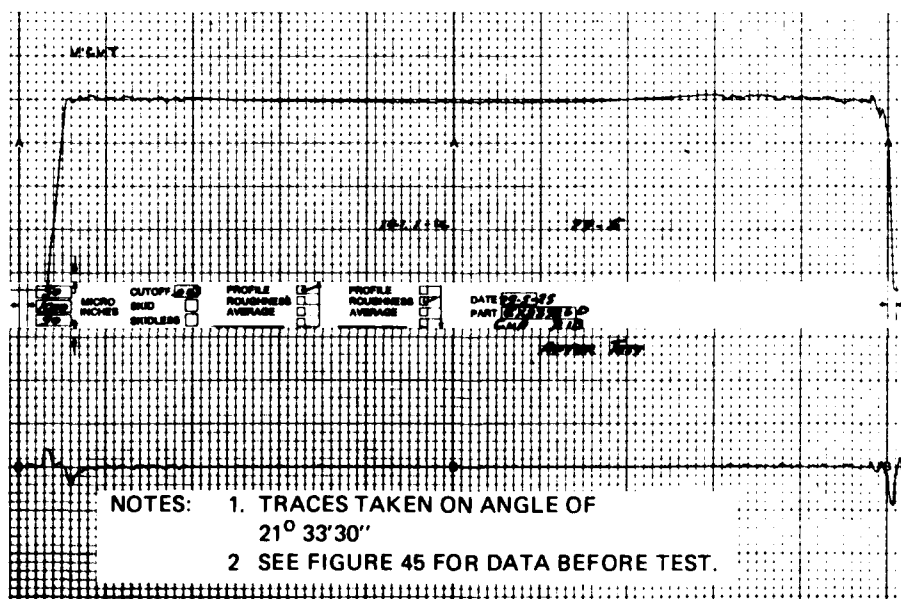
Profile Trace of Cup Rib Face After Test Setup No. 5.
